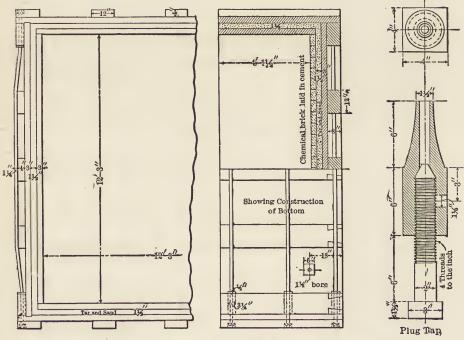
DETAILS OF TANK CONSTRUCTION.
